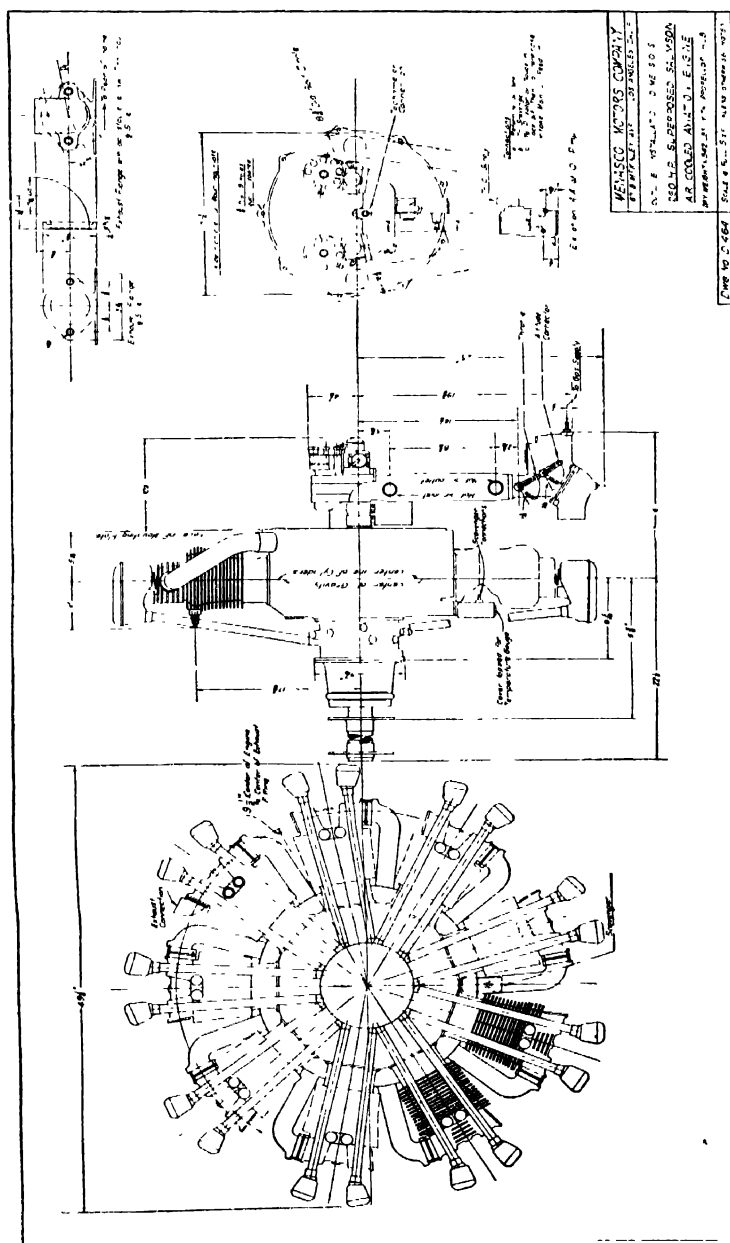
Outline Drawing Showing Installation Dimensions of 260 Horsepower Menasco-Salmson Aviation Engine.
